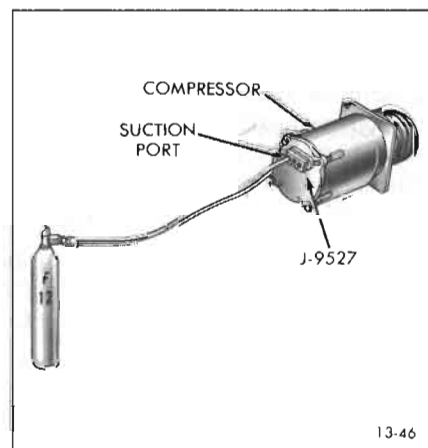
Leak Testing Shaft Seal and Seal Seat O-Ring
